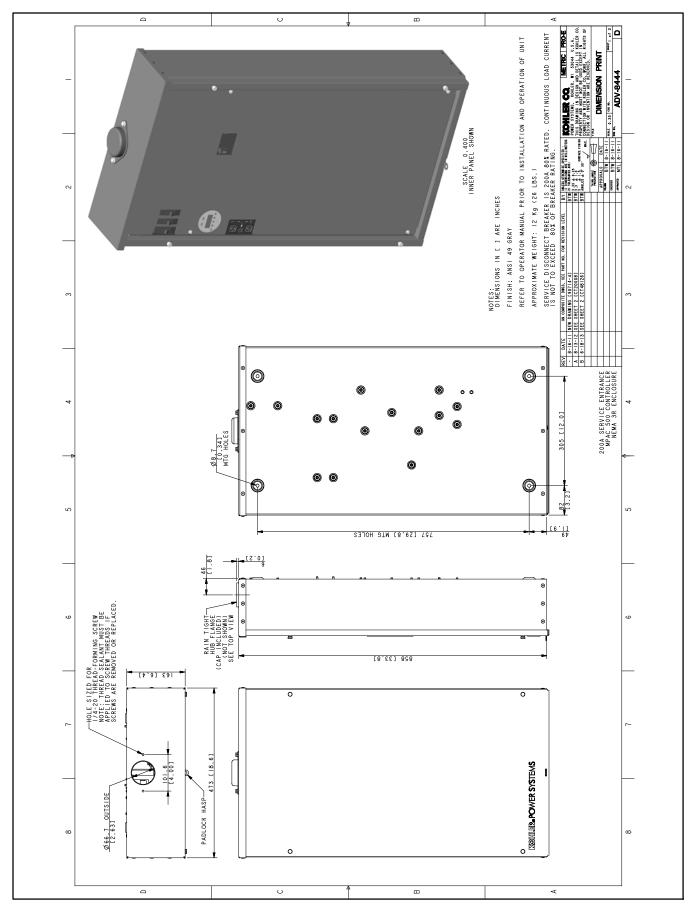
Dimension Drawing, 200 Amp Service Entrance Model, ADV-8444, Sheet 1 of 2
